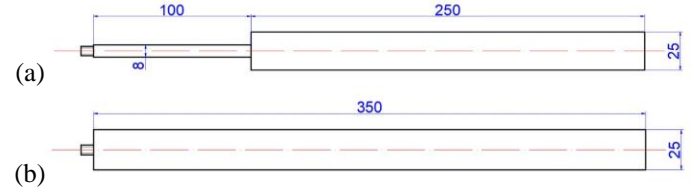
Tube specimens. (a) flexible tube; (b) rigid tube
